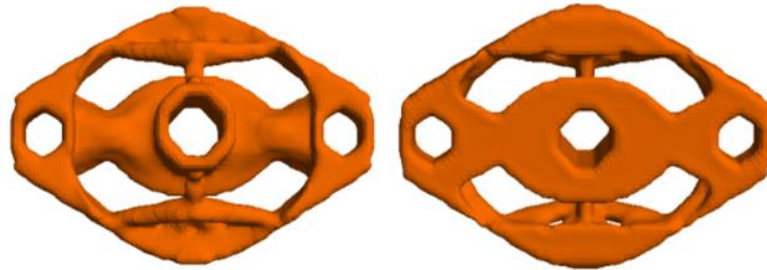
Top view and bottom view of final topology for the pure elastic flange problem.
